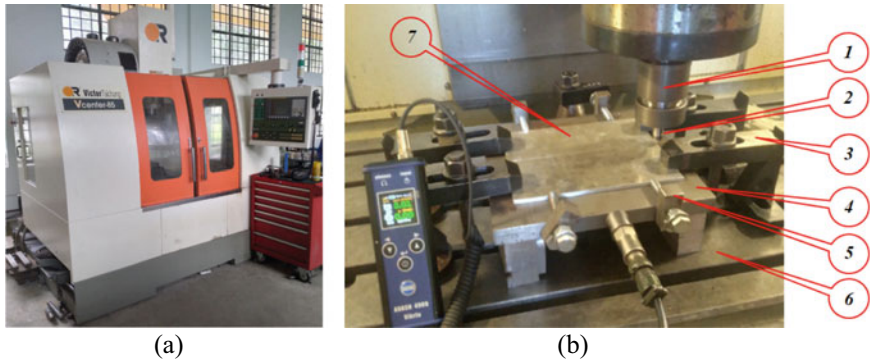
Photos of vertical milling center Vcenter-85 (a) and the experimental diagram (b); 1—head of vertical milling center; 2—FSW tool; 3—vertical clamp; 4—mold; 5—horizontal clamp; 6—table of machine tool; 7—workpiece
